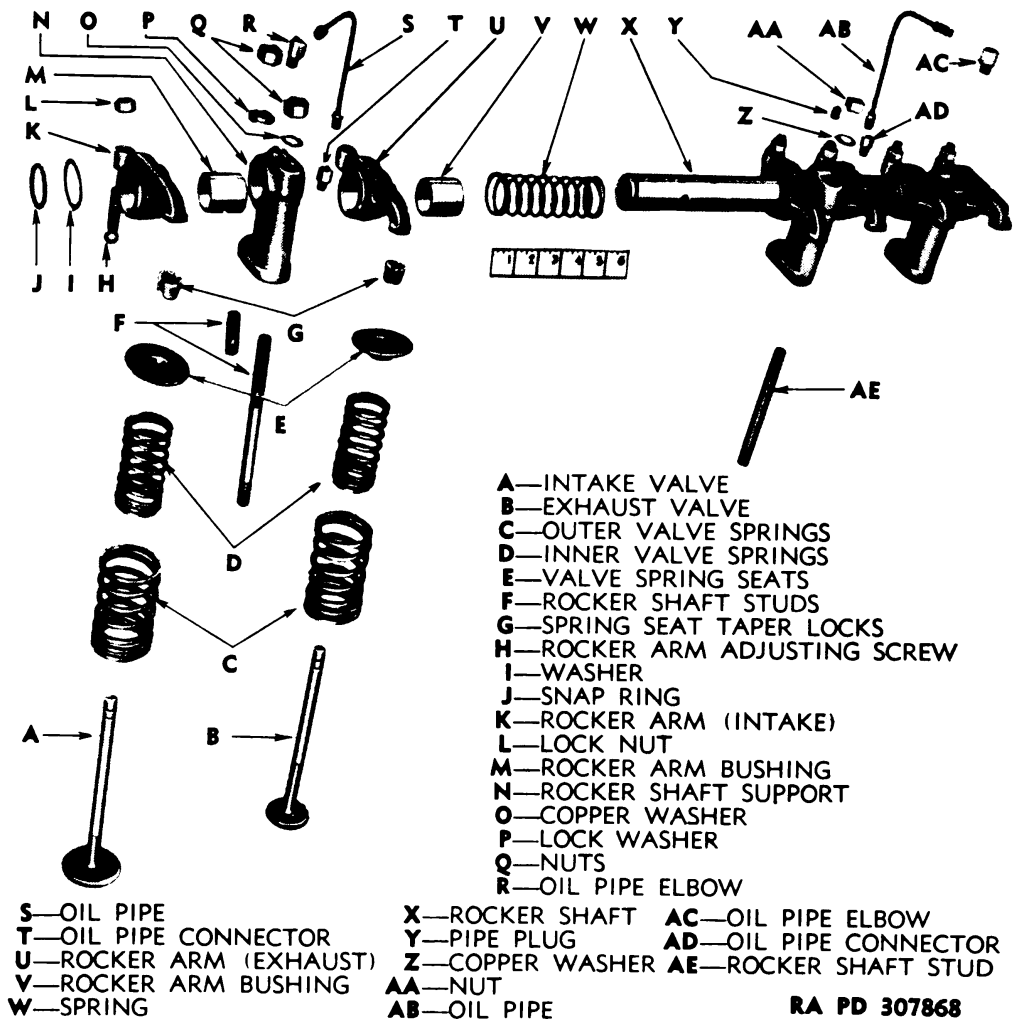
Valves and Rocker Arm Assembly Disassembled
